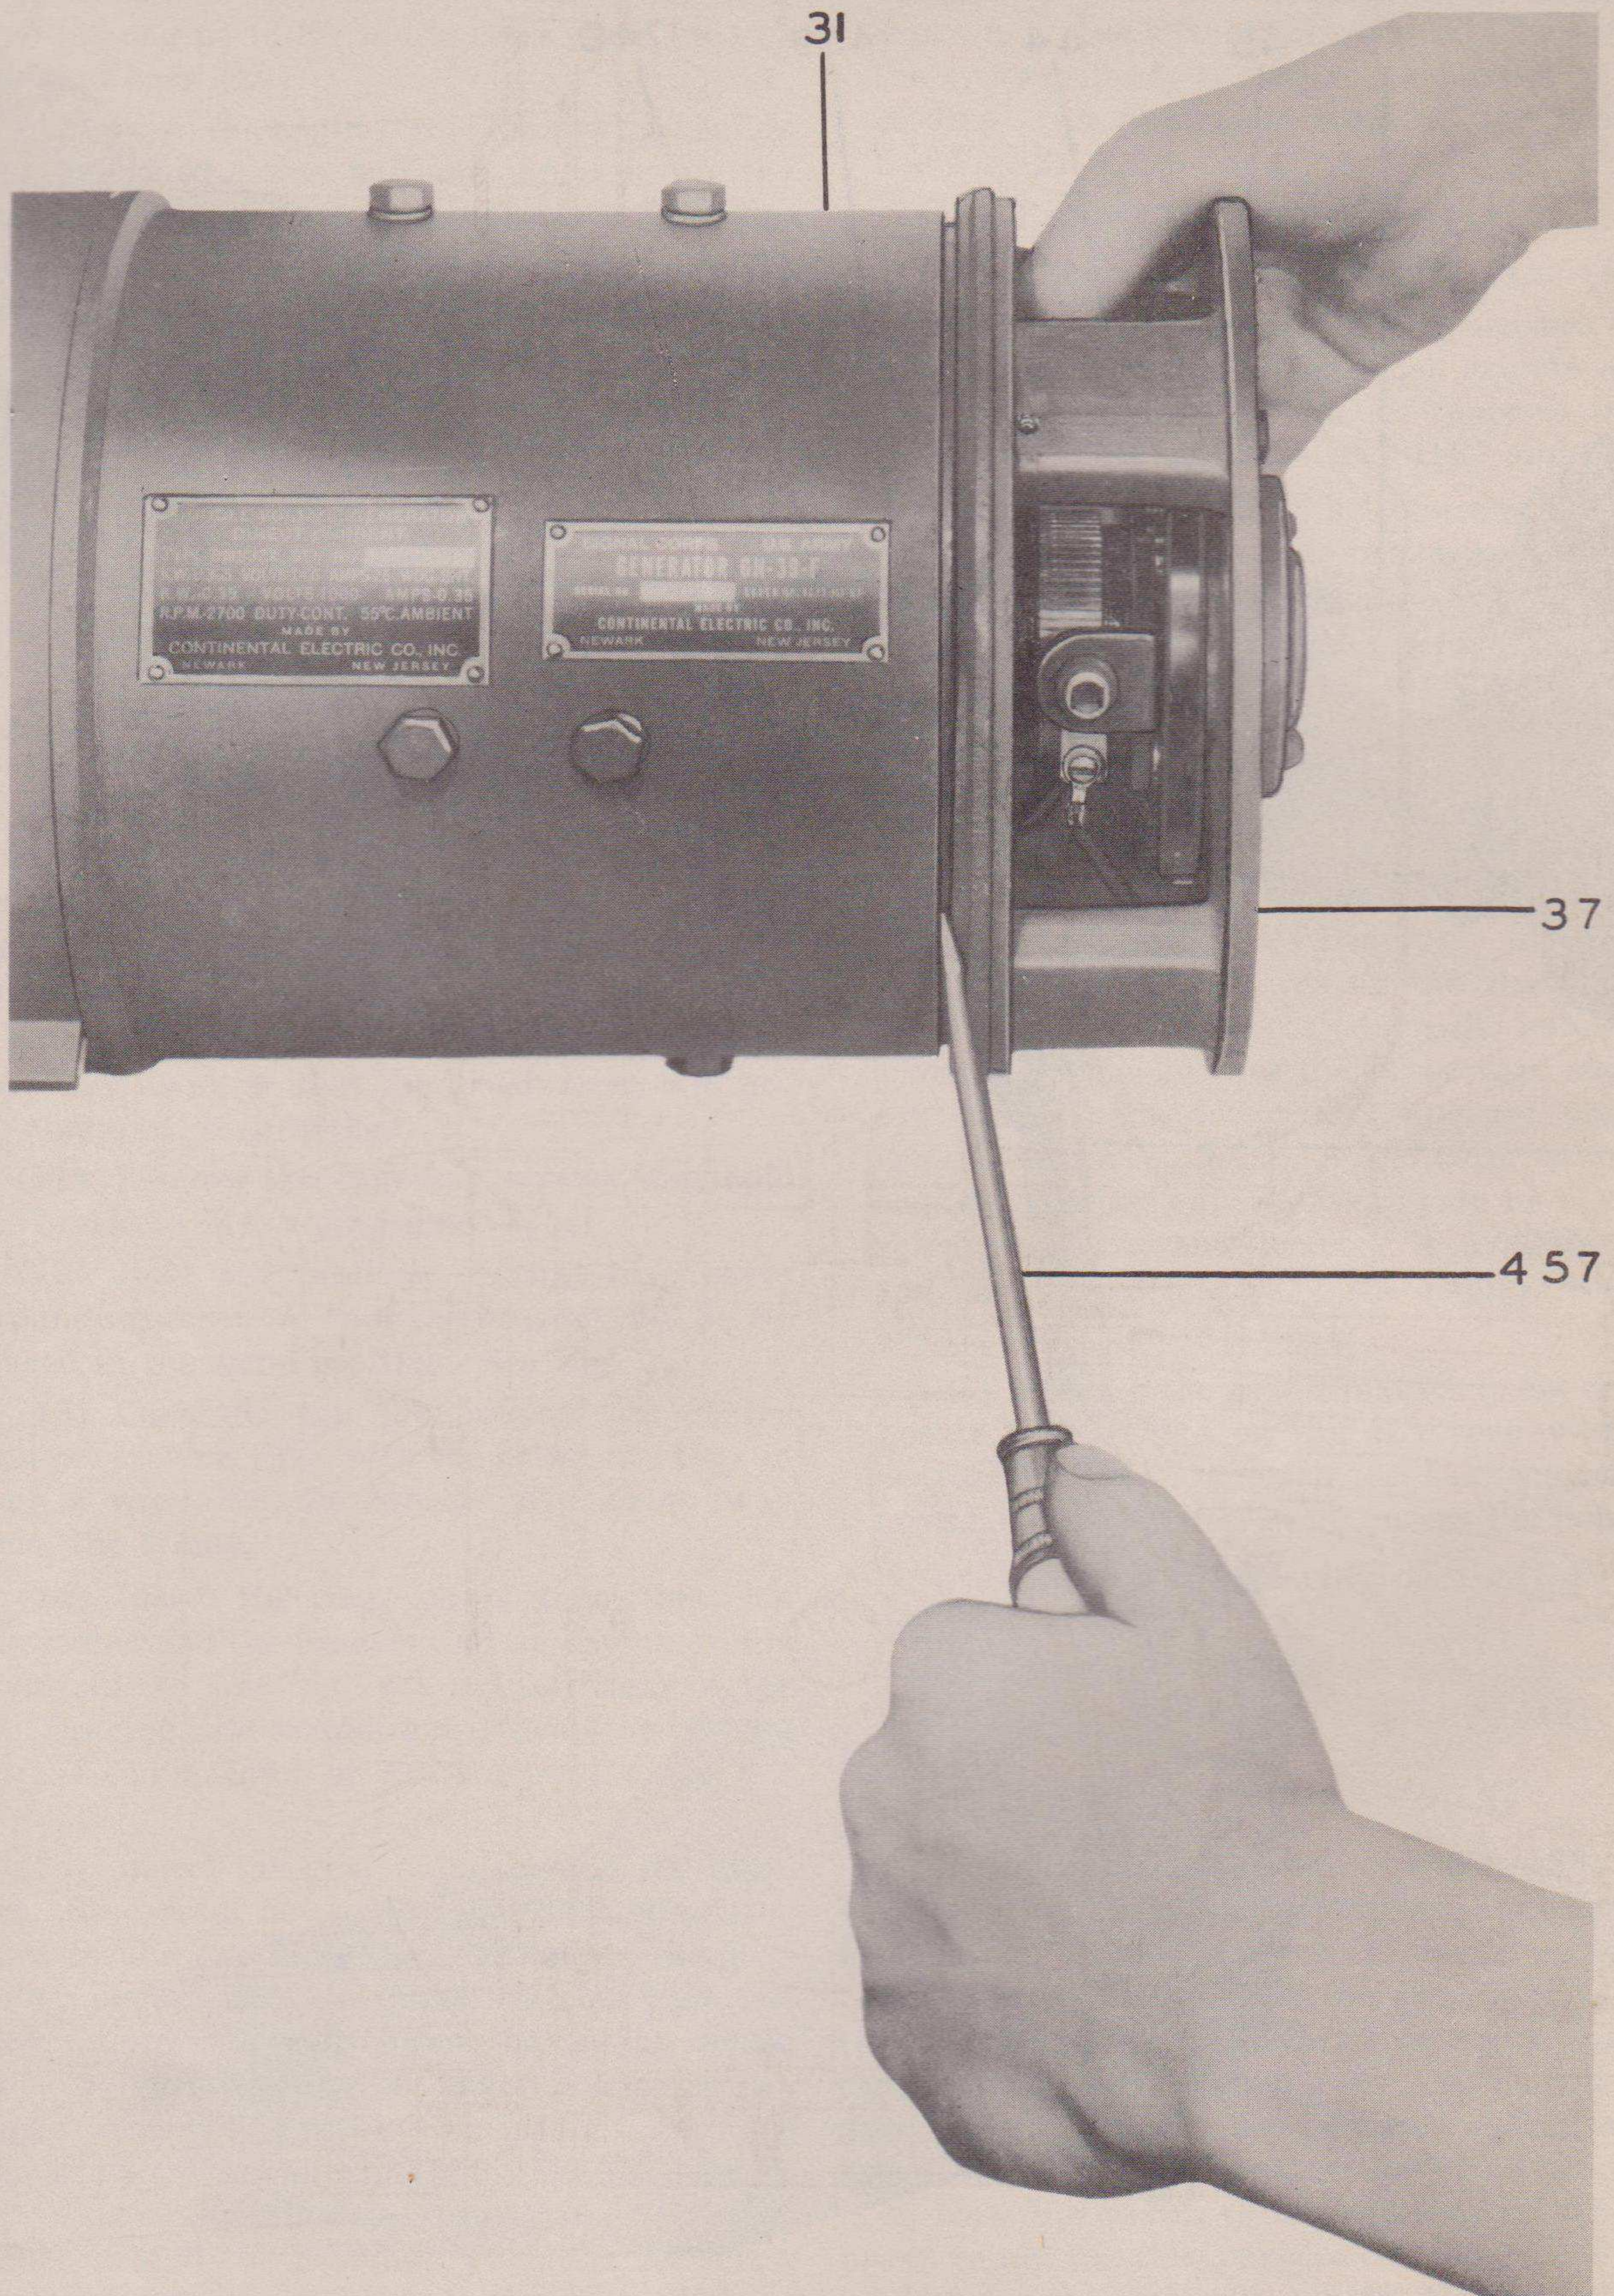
REMOVING THE GENERATOR BEARING BRACKET
